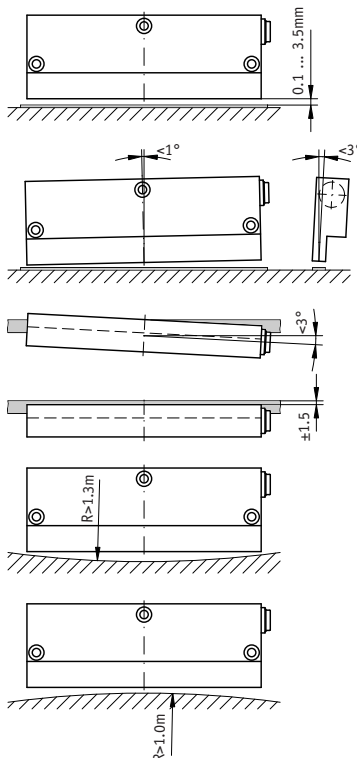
Mounting tolerances (referring to measuring surface "S")
